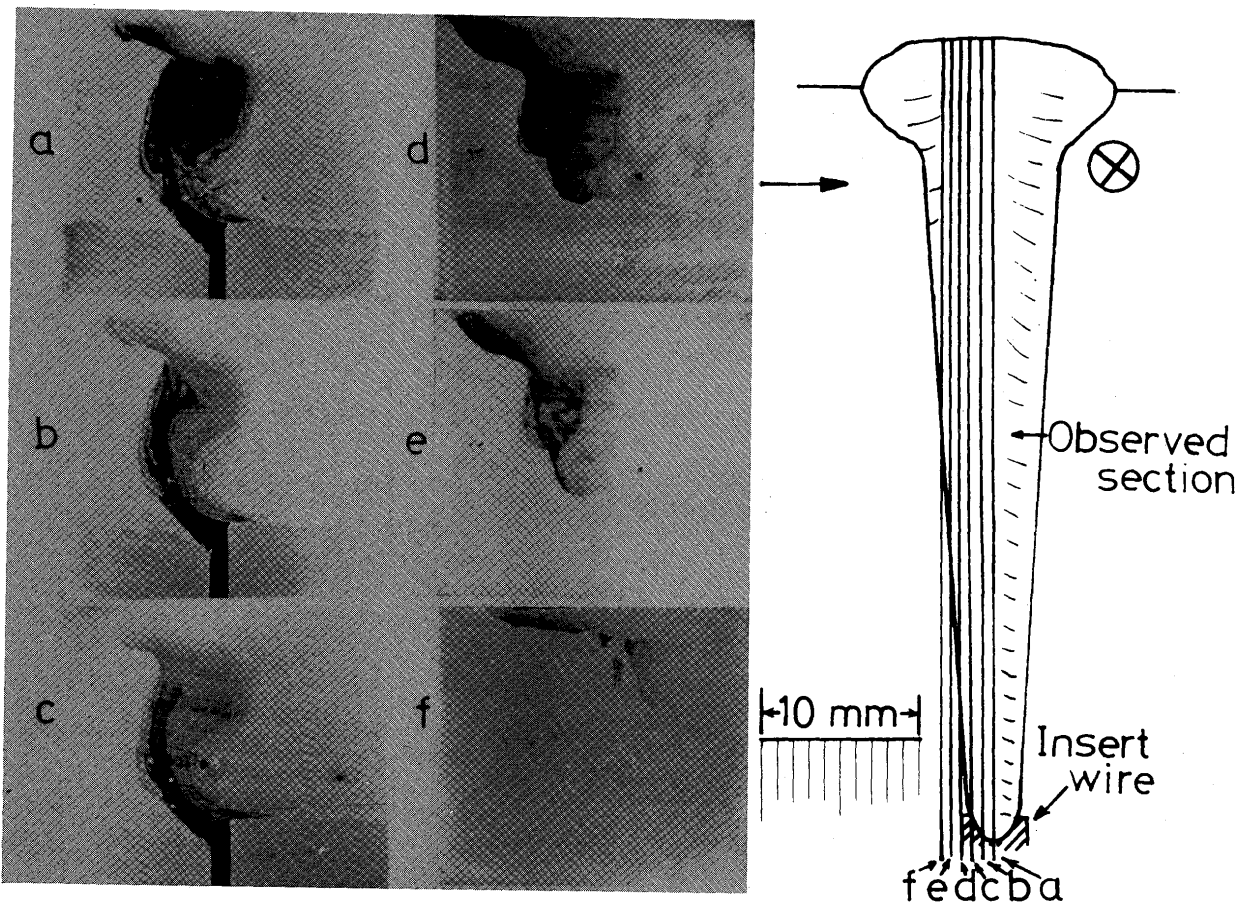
An example of inflow of stainless steel molten metal to carbon steel weld metal.
